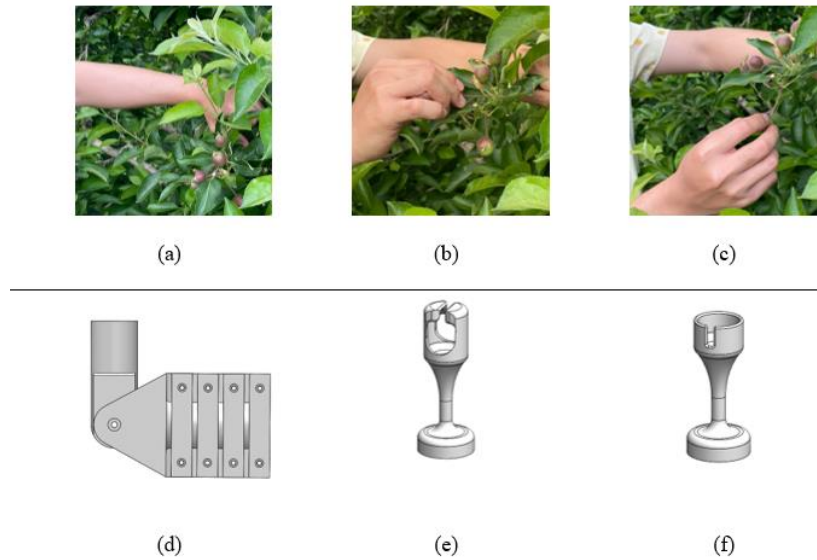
Grips for tension and bending test (a) hand grabbing (b) hand pulling (c) hand bending (d) clamp for fix the branch (e) gripper for tension test (f) gripper for bending test
